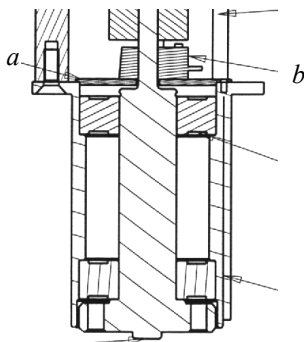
Cut-away projection of the kingpin bearing housing. a; encoder plate, b; encoder.
